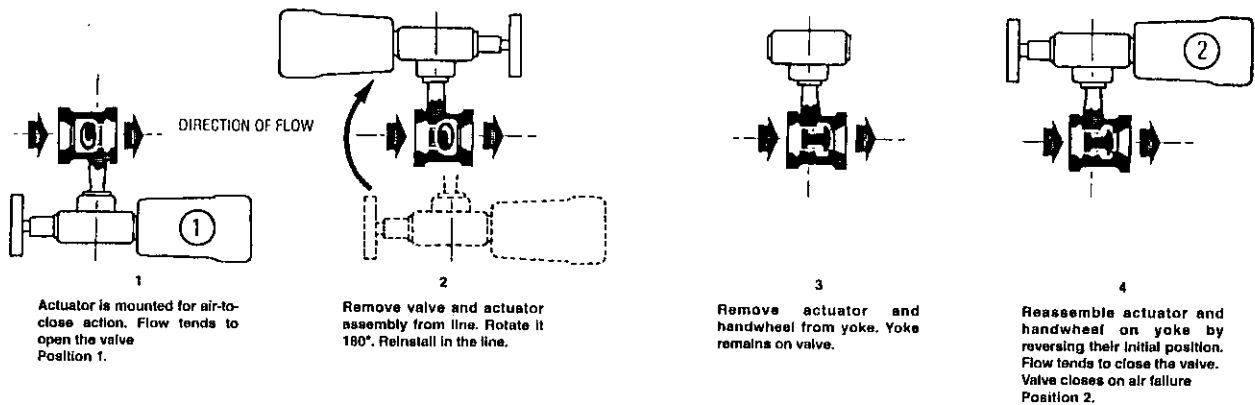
A - Camflex II: Reversing Valve Action First example (Top View)
